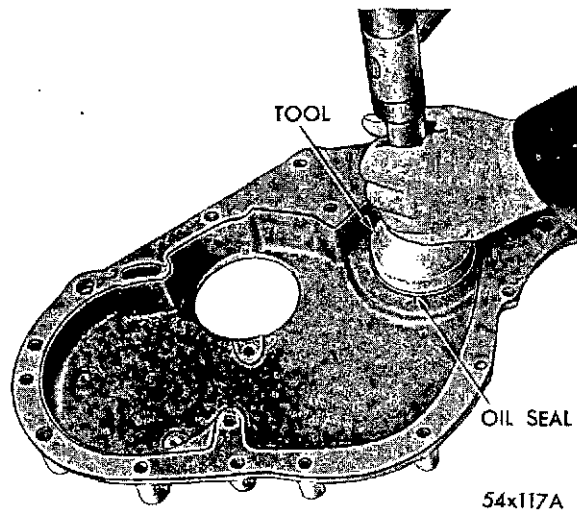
Removing the Accessory Drive Gear Case Cover Oil Seal with Tool C-3050
